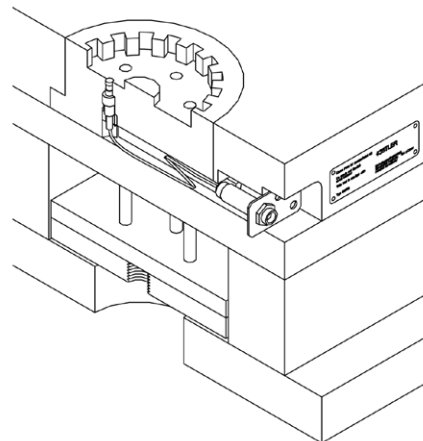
Sensor, cable, connector, mounting plate (Mat. No. 65005208) and identification label (Mat. No. 18031414)
